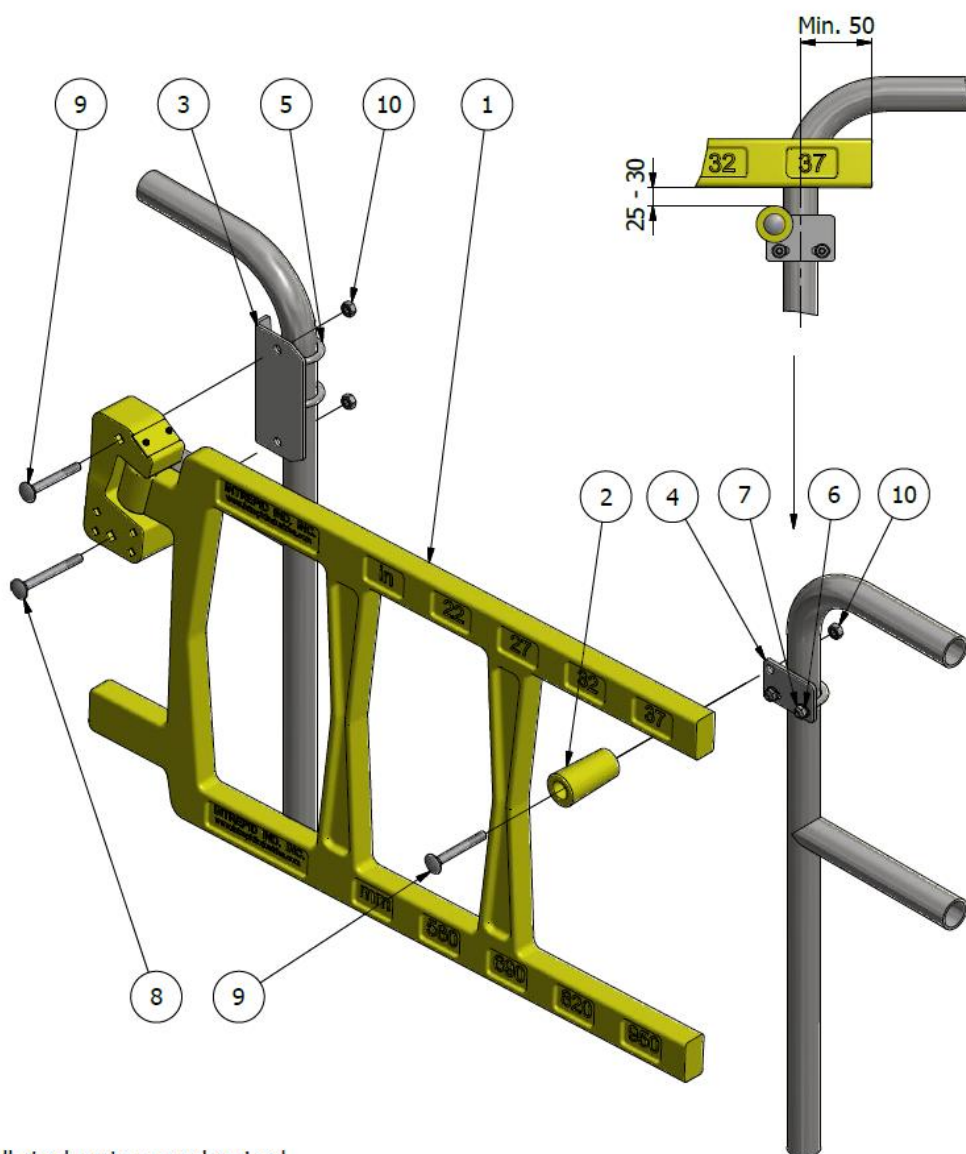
and 6, drawings for adapter of mounting bracket for pipes
